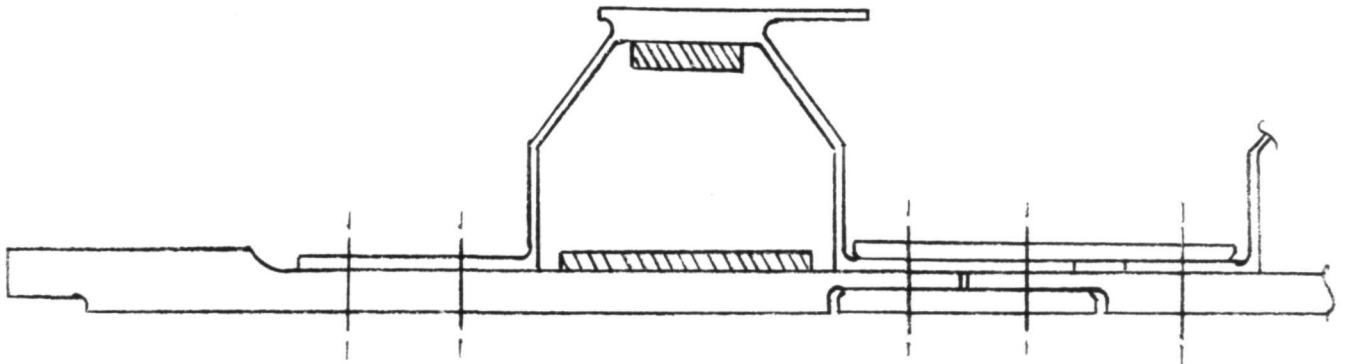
DETAIL OF CRACKED AREA AT W.S. 120
